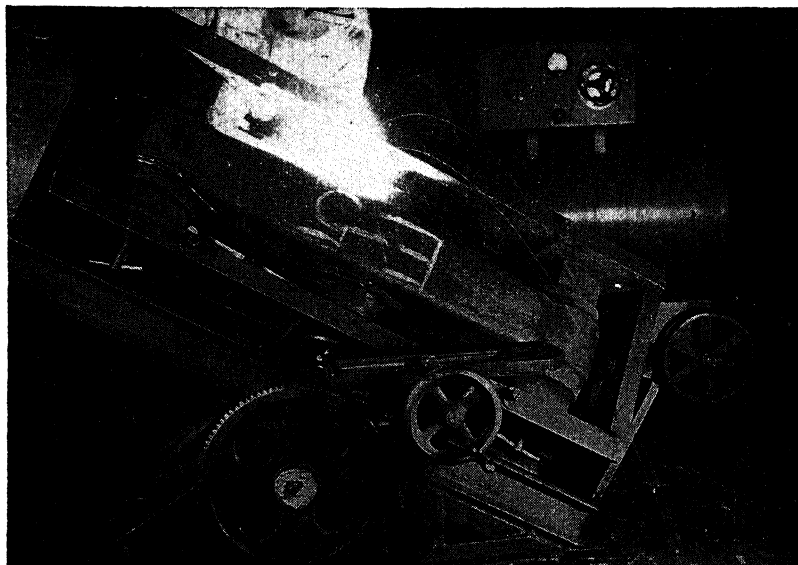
Shop-built welded steel positioning jig for welding rocker beam of earth-moving equipment.
